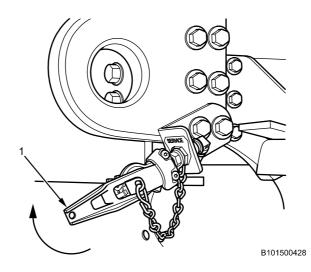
Dummy Gladhand Installation (Rear Service Shown; Front Similar).
